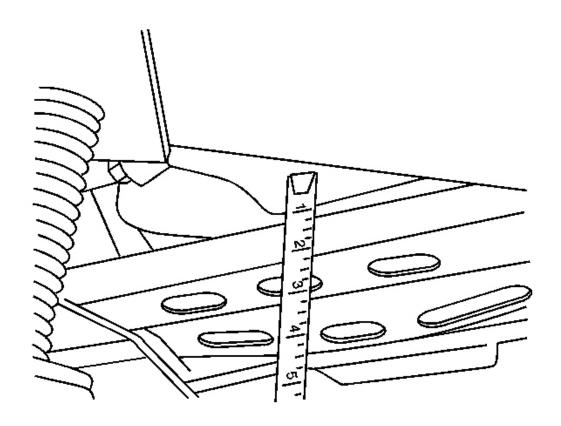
Measuring Engine Elevation Courtesy of GENERAL MOTORS CORP.
